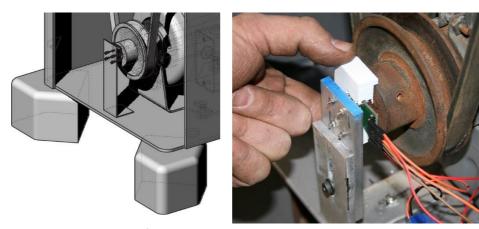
3D model of sensor placement and alignment using 3D printed positioning jig.
